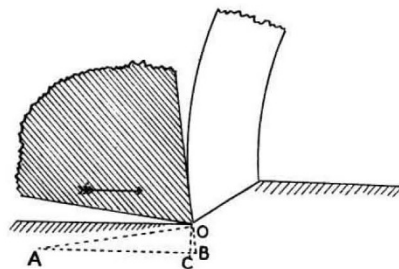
OA, normal force on face of tool; BO, frictional force on face of tool; OC, component of OA tending to make the tool "dig"; CO, component of BO tending to make the tool lift.
